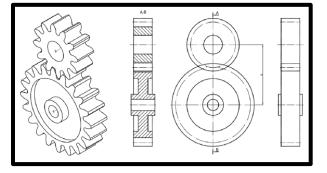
Representation of a cylindrical gear with straight teeth. <sup>12</sup>
